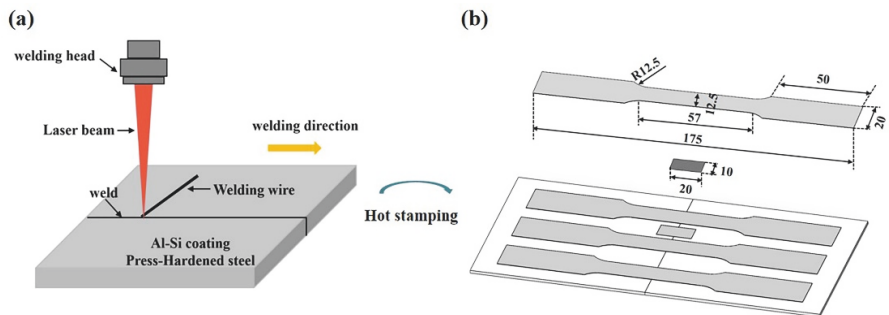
(a) Schematic diagram of laser welding with filler wire (b) Schematic diagram of tensile sample (unit: mm).
